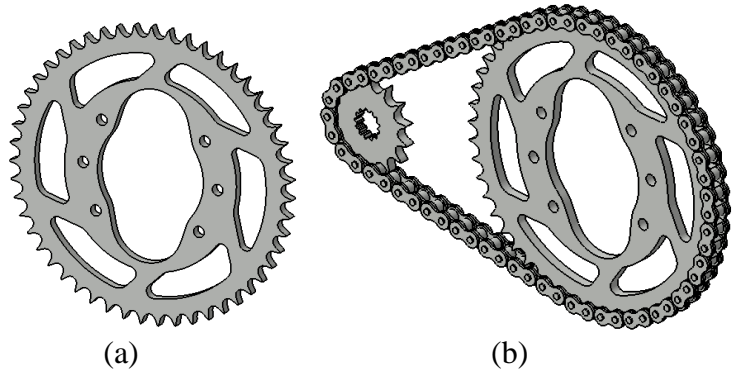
CAD models: (a) Sprocket & (b) Chaindrive assembly
